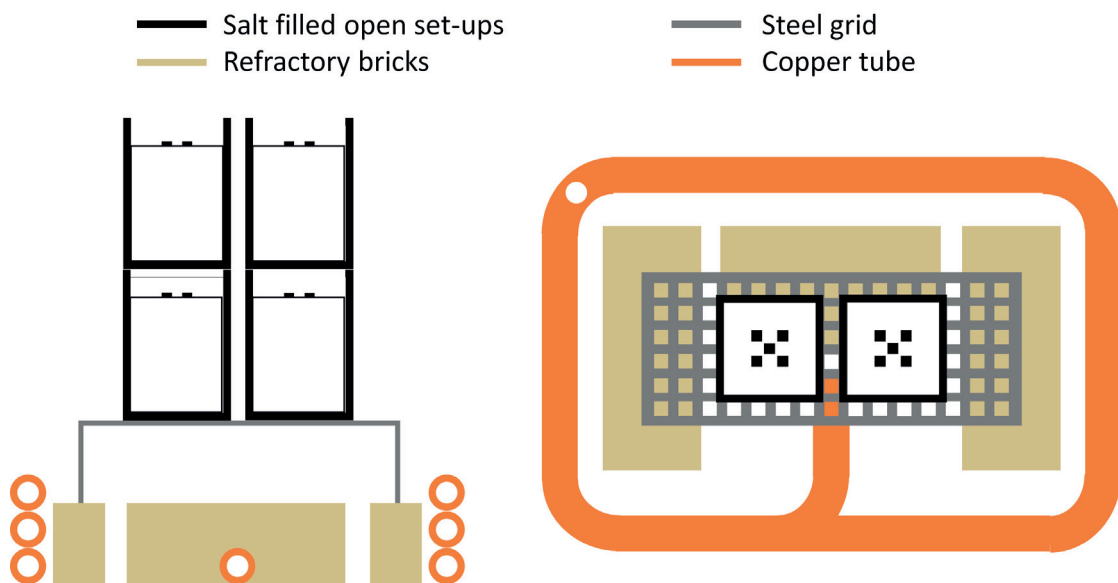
Front (left) and top (right) schematic views of the oven configuration during molds drying.
